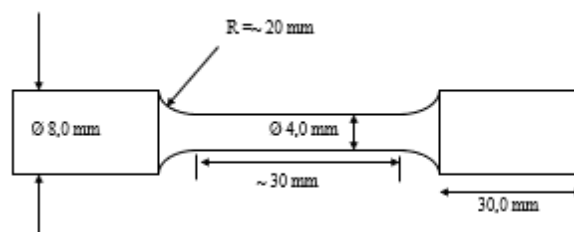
Illustration of the dimensions of the tensile test sample.
